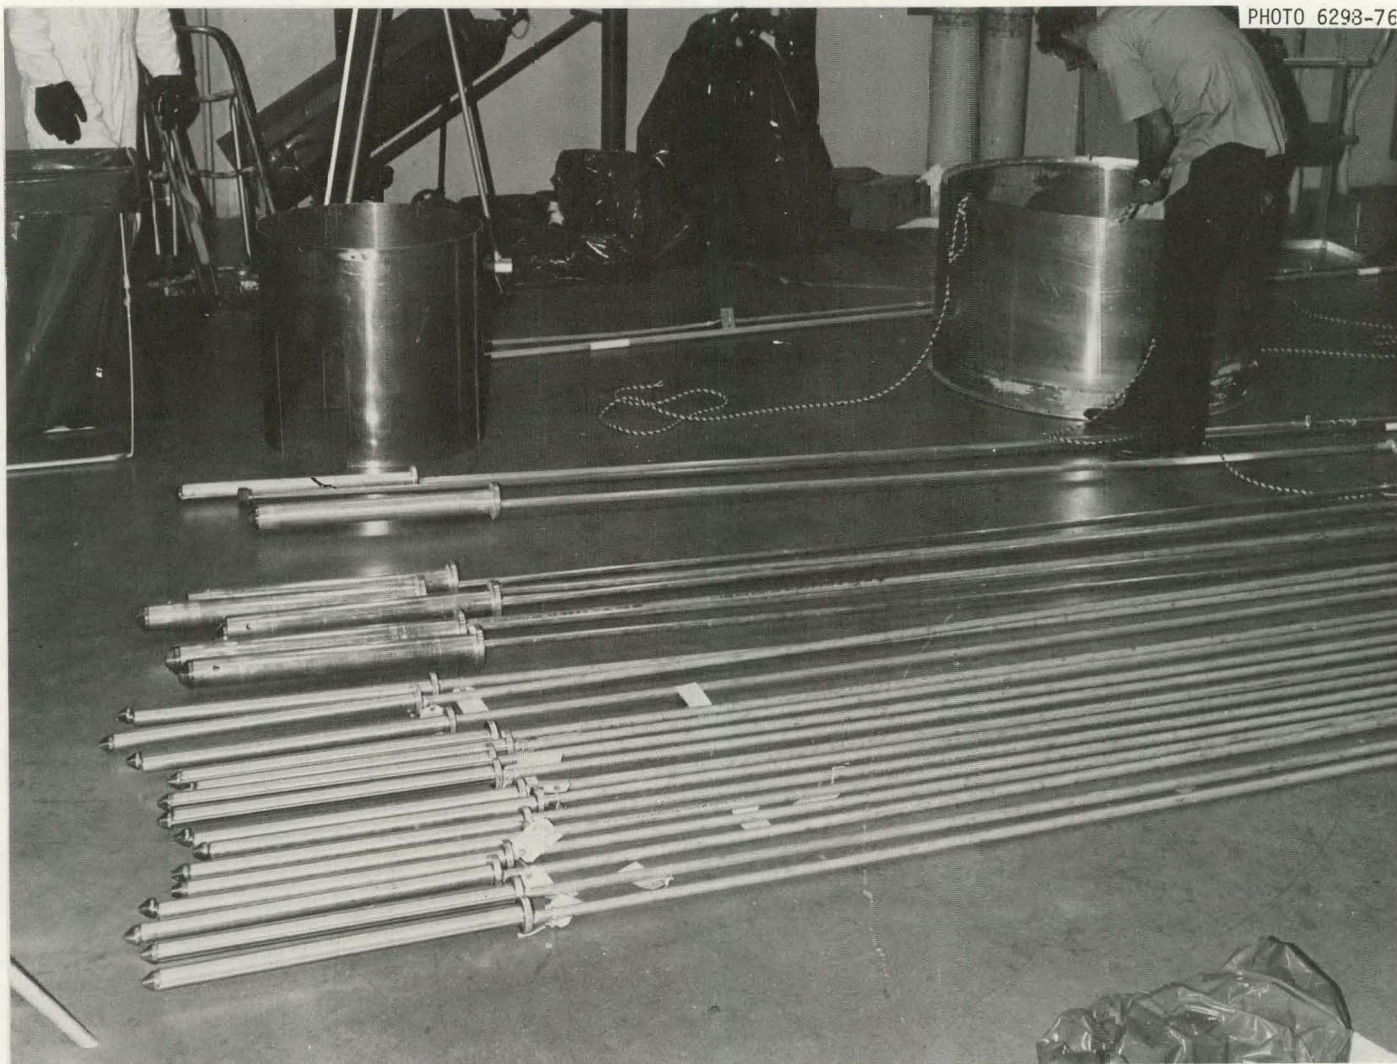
Some of the Special Tools Used to Remove the Cracked Beryllium
